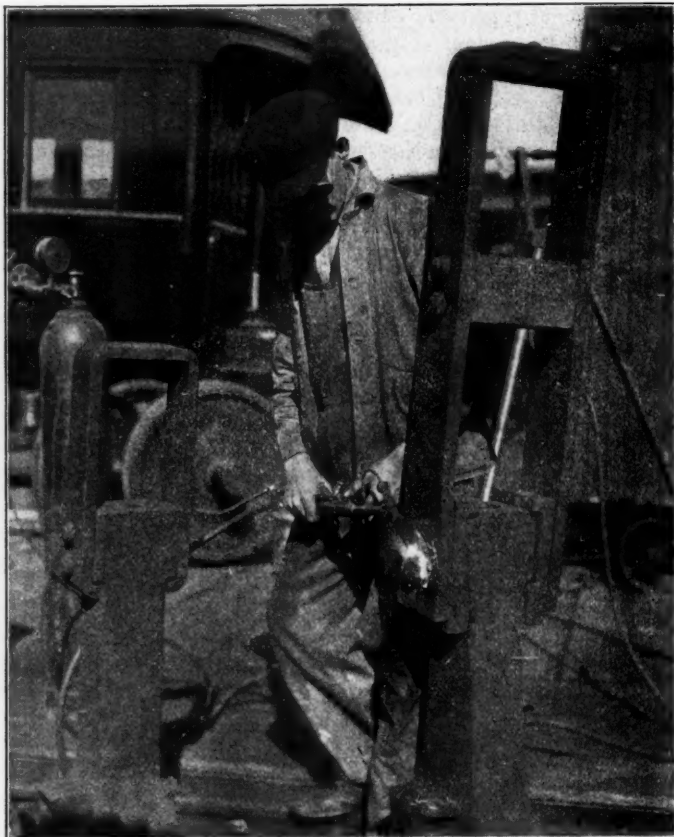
Cutting off Rivet Head on Coupler Yoke with Oxy-Acetylene Torch.
